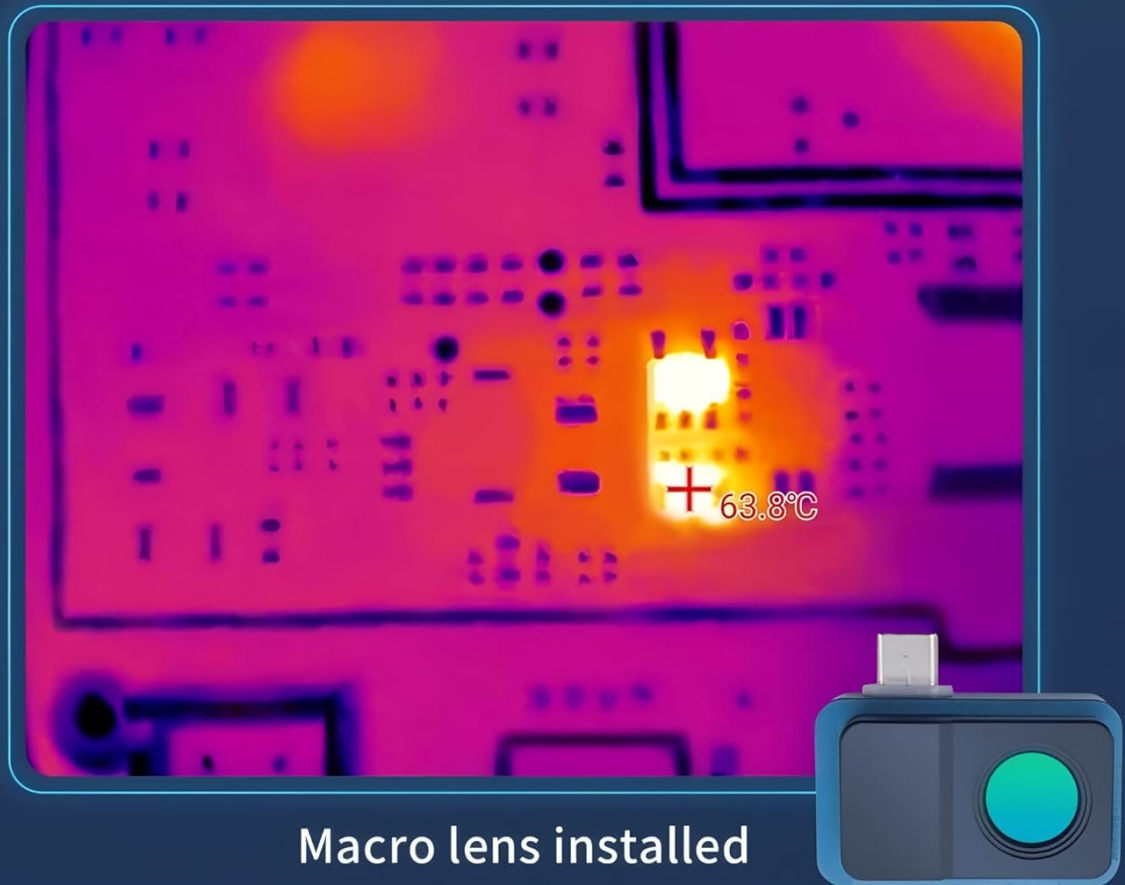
The optional magnetic macro lens installed on the TOOLTOP T7 Thermal Camera, showing a detailed thermal view of a circuit board.
